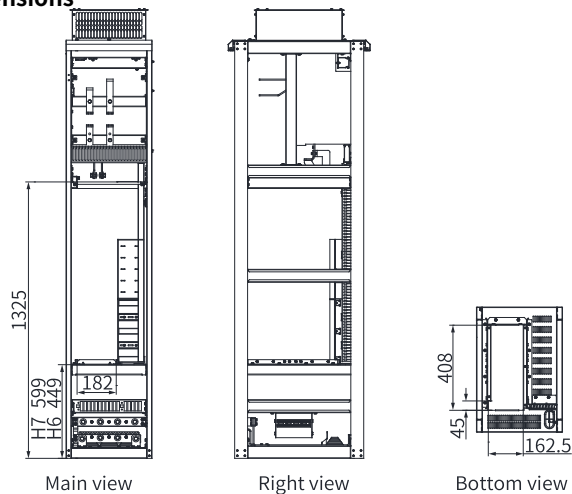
Dimensions of H6/H7 drive cabinets with a width of 400 mm
